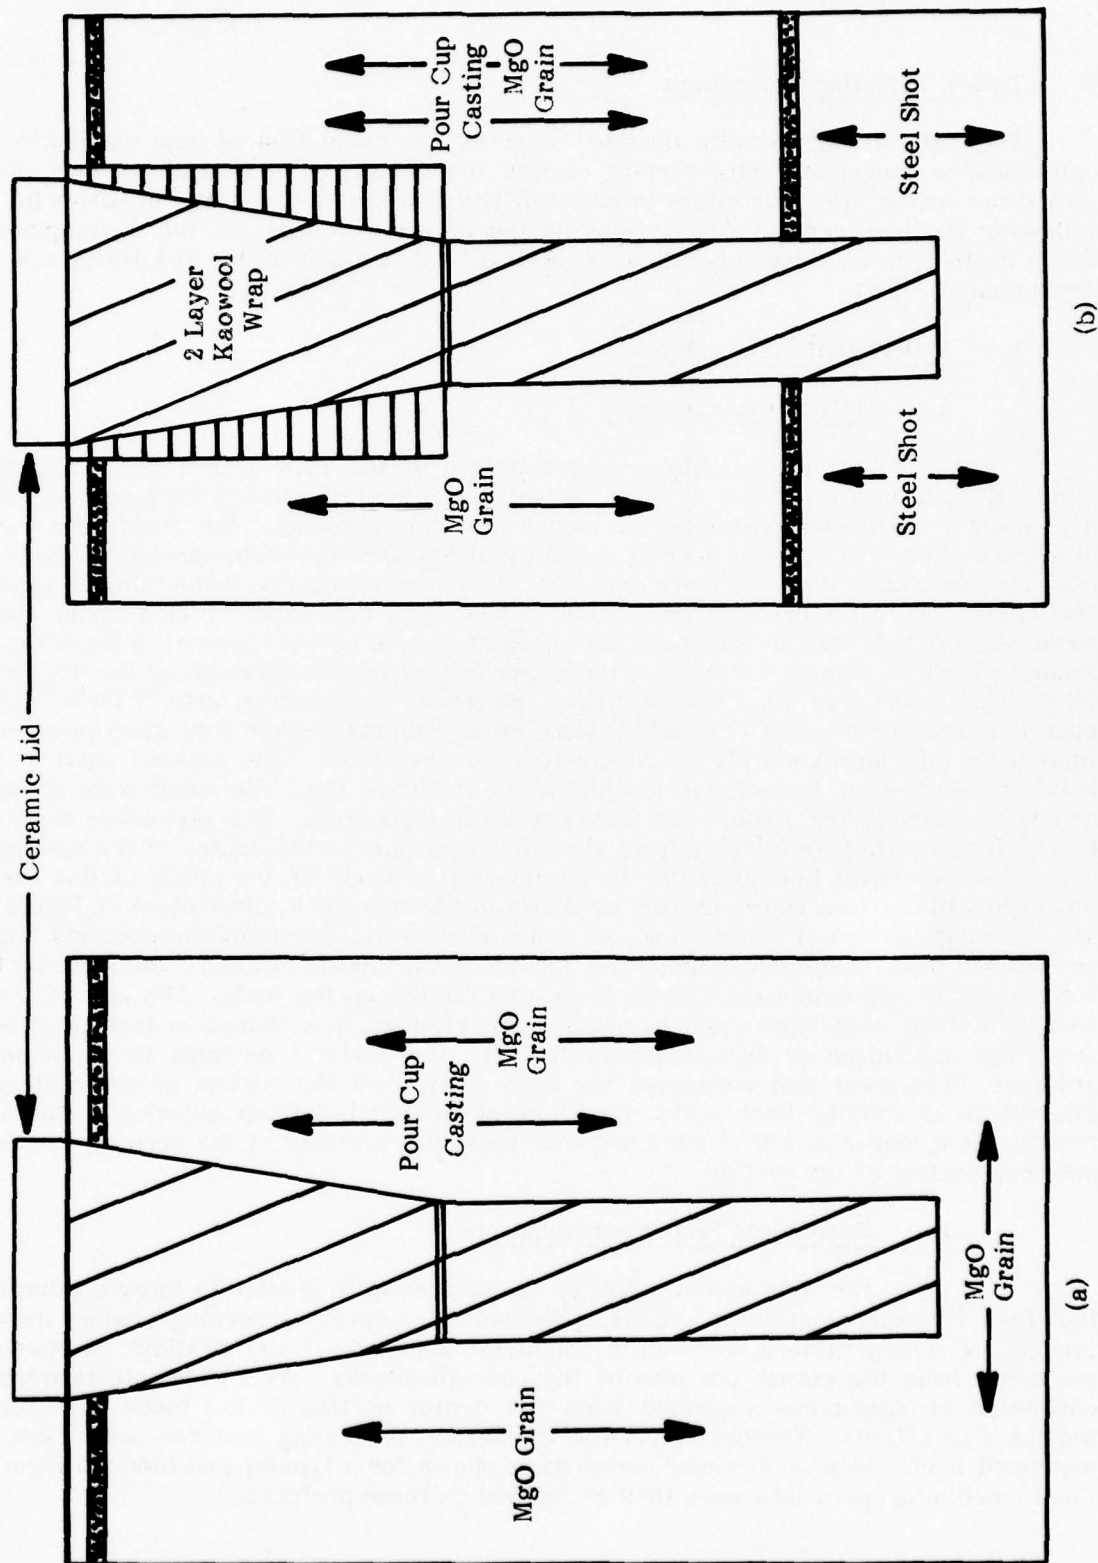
Mold investment scheme for Task II (casting superalloys) for
